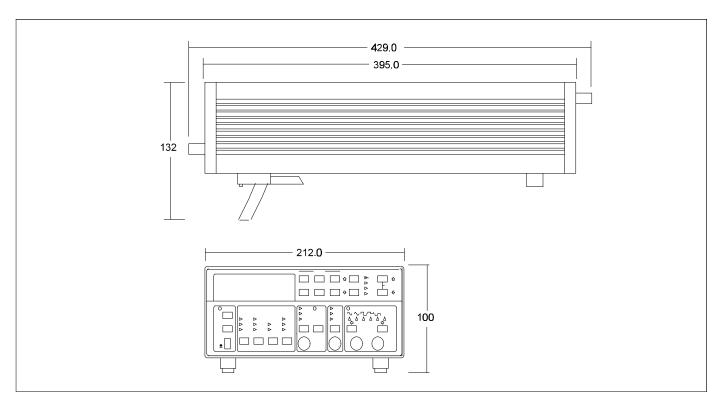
Model 8550/8551 - Outline Dimensions.
